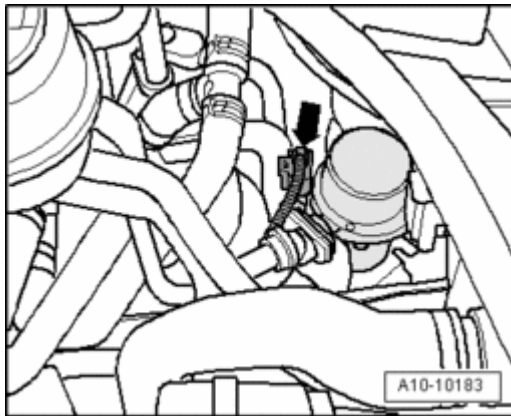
Identifying Coolant Pump Electrical Connector & Bolts
